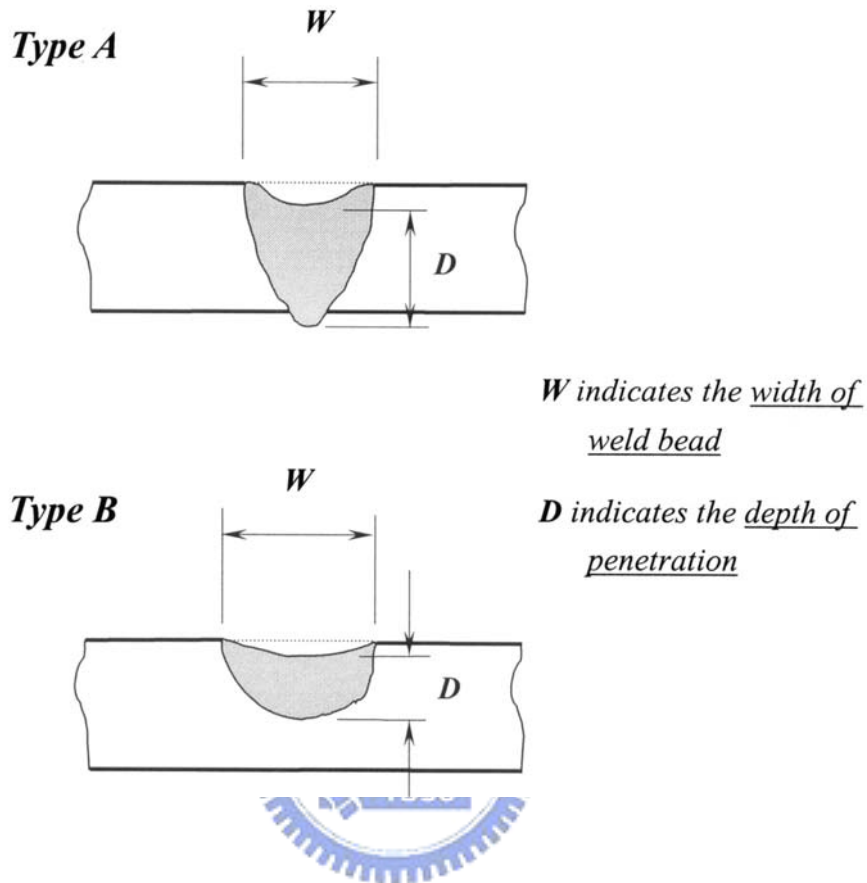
Schematic of measurement for weld pool geometry
